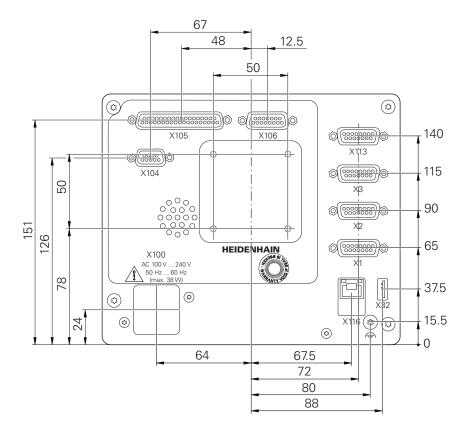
Housing dimensions of the rear panel for devices with ID 1089179-xx $\,$
